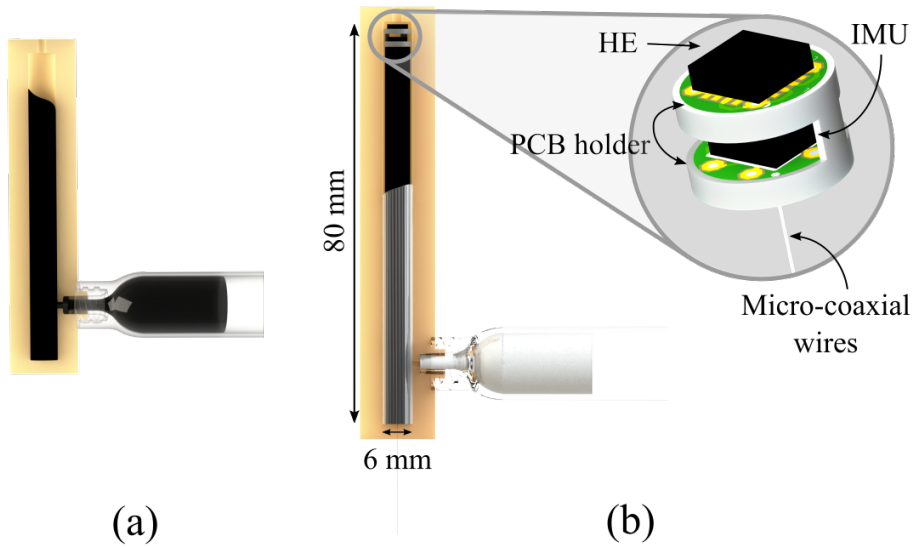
Schematic representation of the continuum robot fabrication with a sensorized tip containing an IMU and HE sensor. (a) Silicone rubber with magnetic particles is injected into a mould, (b) Sensors are held in place through a PCB holder which is embedded in the overall SCR.
